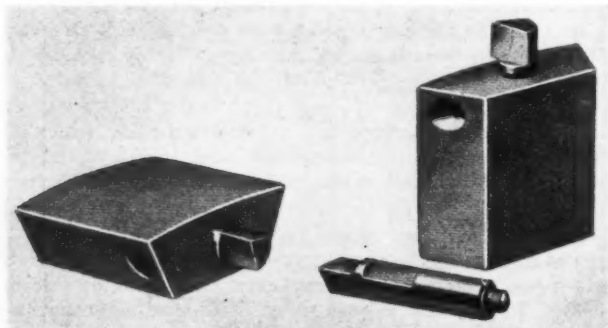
ALUMINUM BLOCKS HOLDING CUTTING-CARBIDE TOOLS ON A GRINDING WHEEL USED FOR MILLING
